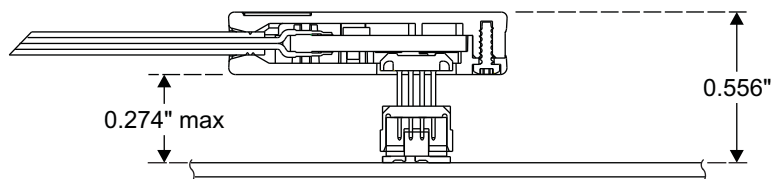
XDS560T TI 60-Pin Target Cable Connector Minimum Clearance - Height
